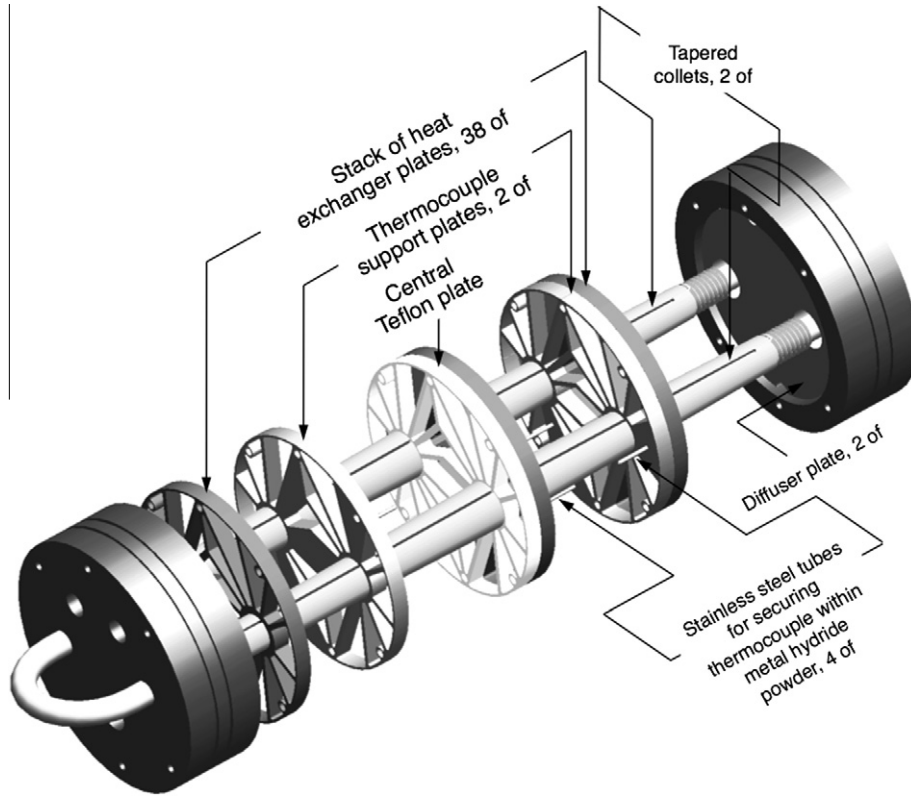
Detailed 3-D rendering of heat exchanger assembly.
